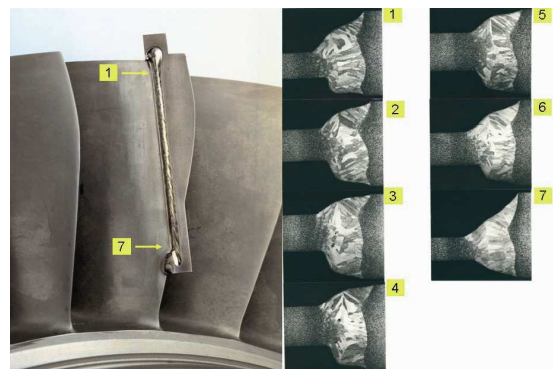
Laser welded low-pressure compressor blisk (left) and transverse microsections taken alongside the weld (right).
